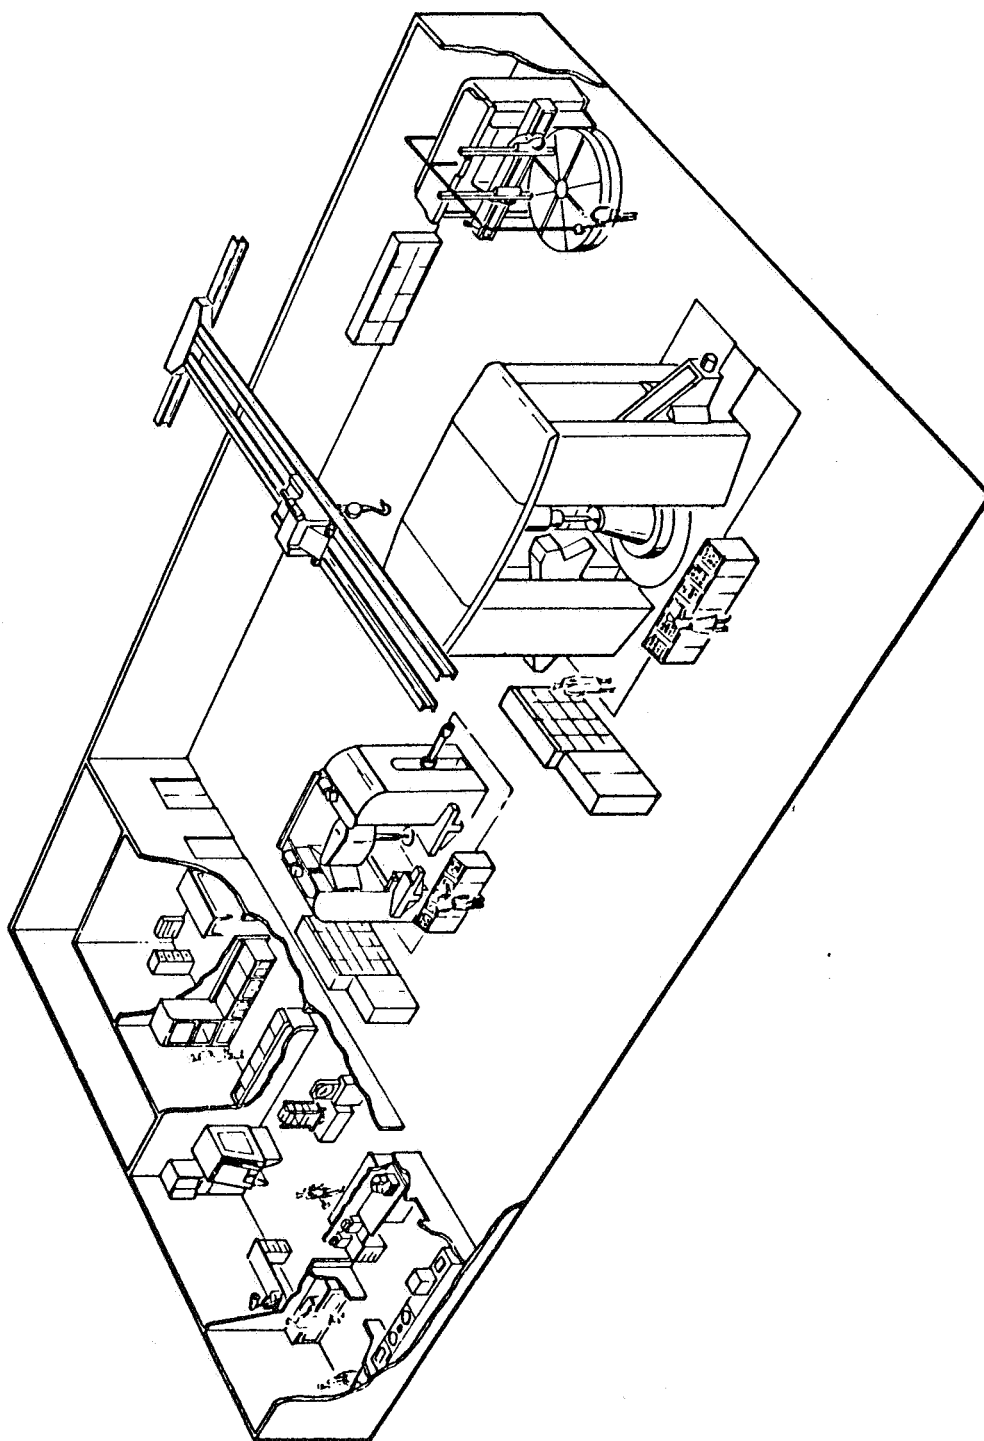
TYPICAL SHOP LAYOUT FOR SHEAR FORMING
